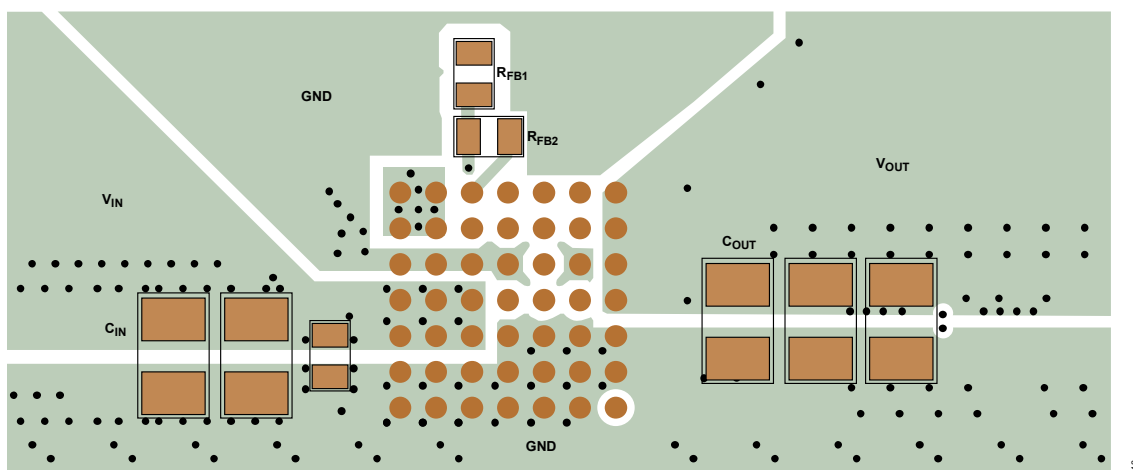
Recommended PCB Layout showing suggested External Components, GND Plane, and Thermal Vias
